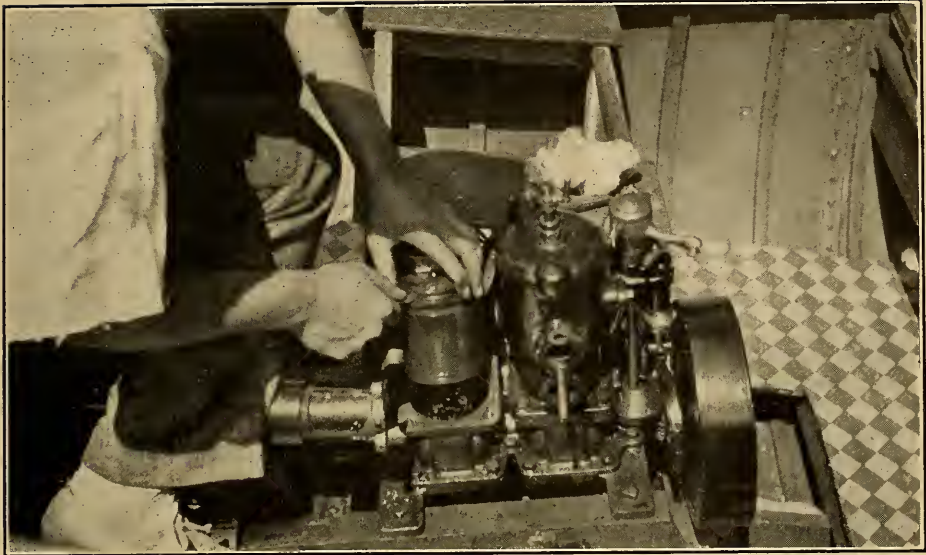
A MOTOR OF THE SOLID HEAD CYLINDER TYPE, WITH CYLINDER REMOVED IN ORDER TO REACH THE RINGS
